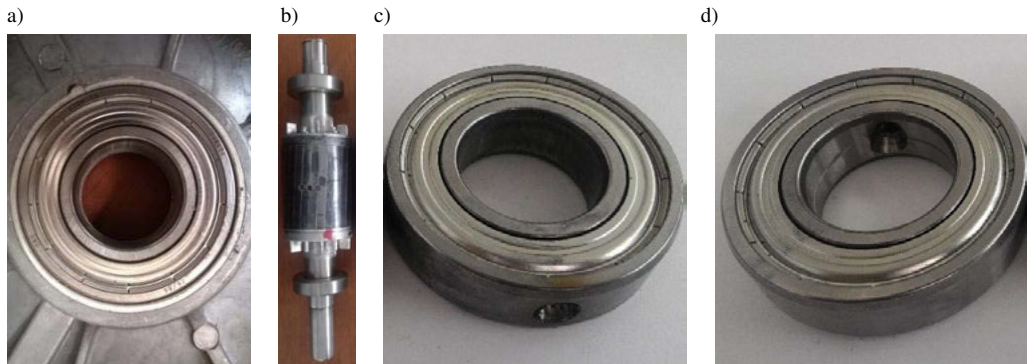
Induction motor faults: a) static eccentricity fault, b) broken rotor bars, c) outer-race bearing faults, d) inner-race bearing faults.
